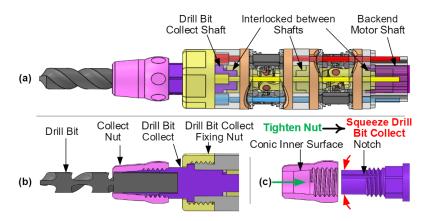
Drill tip assembly. (a) Torque transmission between shafts; (b) Cross section view of drill bit and its holder; (c) drill bit holding principle.
